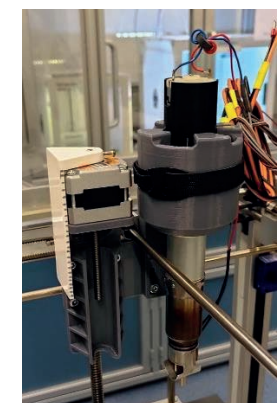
Closeup of the DIY printer printheads, the solder paste extruder (left) and hot air gun (right)
